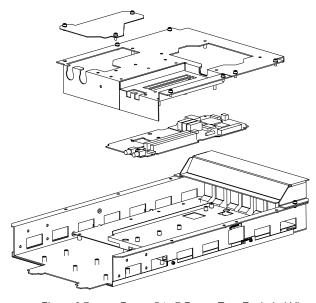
Frame 5 to 7 Power Tray Exploded View
